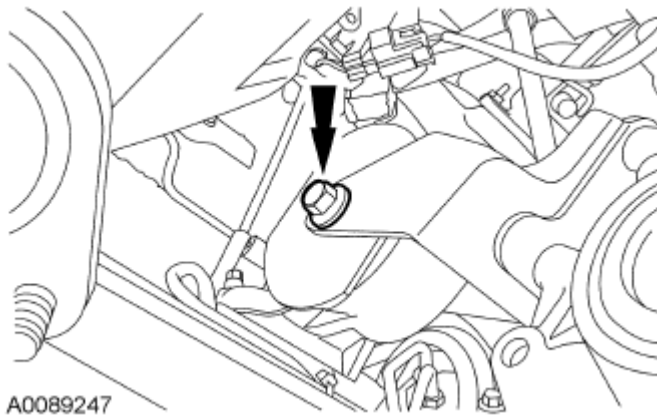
Locating RH Transaxle Support Insulator Bolt
